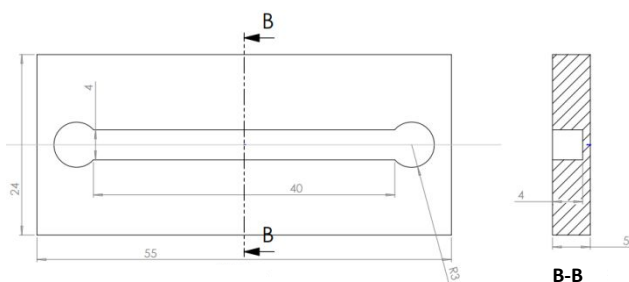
Machine drawing of the channel used in this demonstration (unit: mm).
